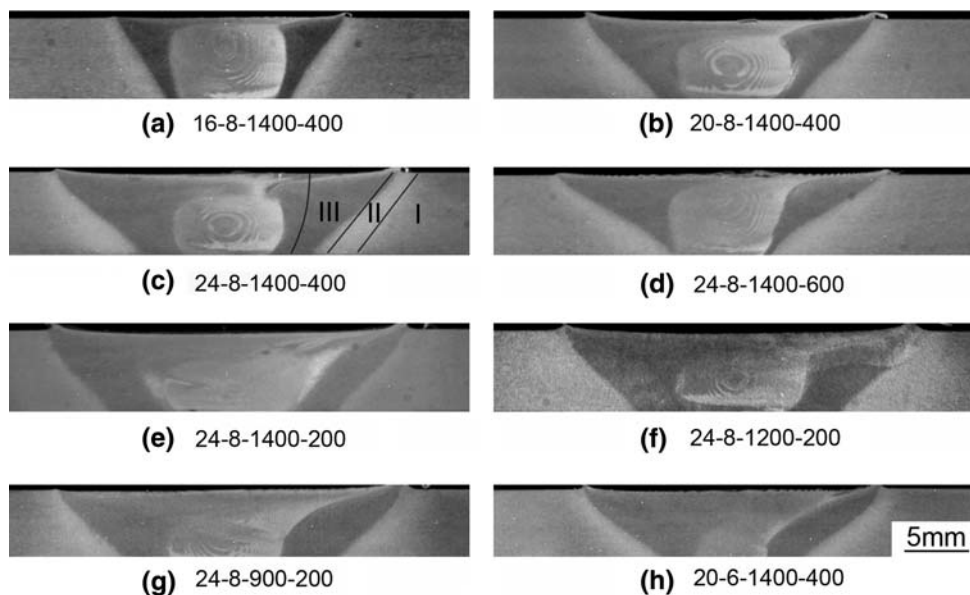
Cross-sectional macrostructures of FSW 6061Al-T651 joints.
